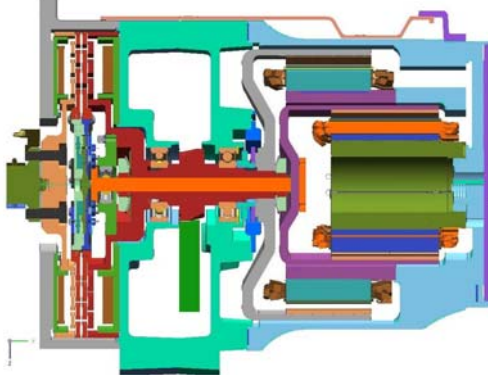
Mogen* cut showing clutch, gearbox bay and motor/generator arrangement
